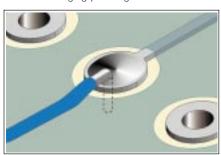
Acceptable* Wire soldered into plated-through hole.
